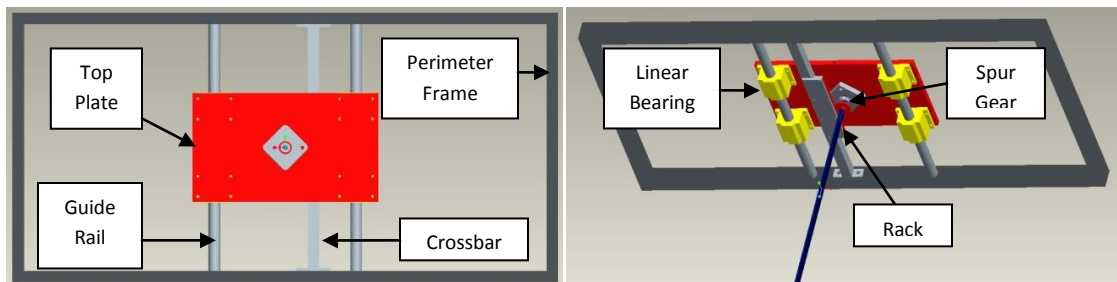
Model of Pitch-Plunge Fixture Top (left) and Bottom (right) View
